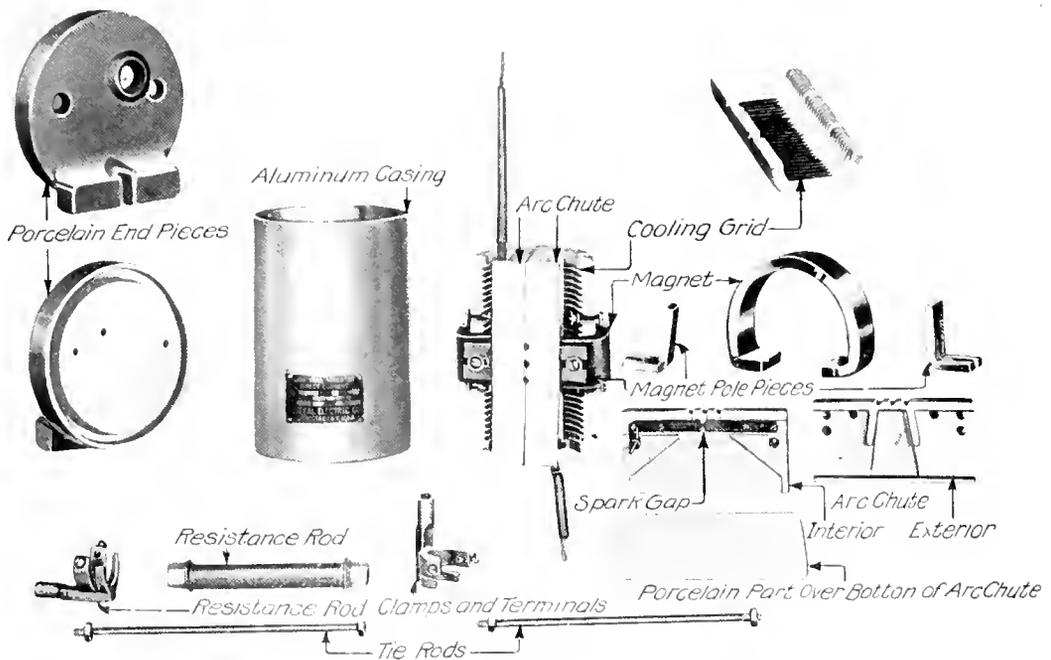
Exploded View of the Magnetic Blowout Arrester shown in Fig. 2
